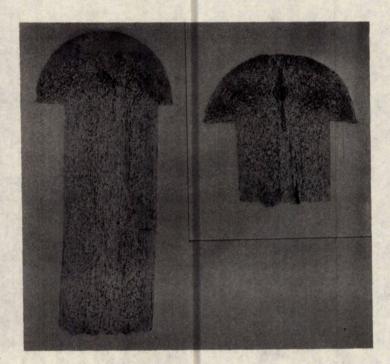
Sulphur Prints, Rivet No. 3 (left), Rivet No. 2 (right). 1
